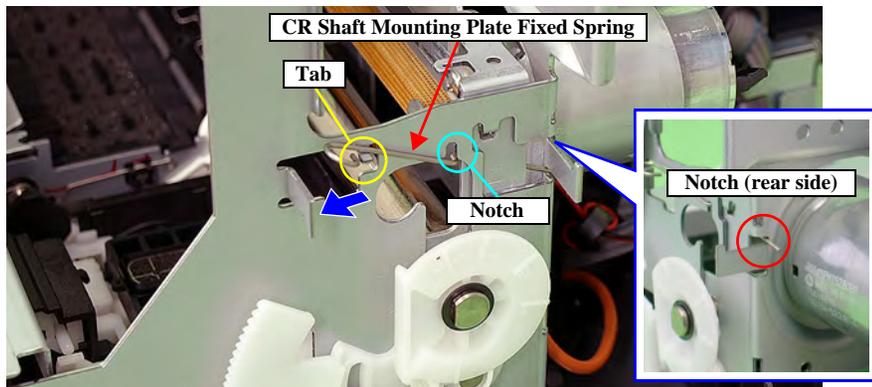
Removing CR Shaft Mounting Plate Fixed Spring
